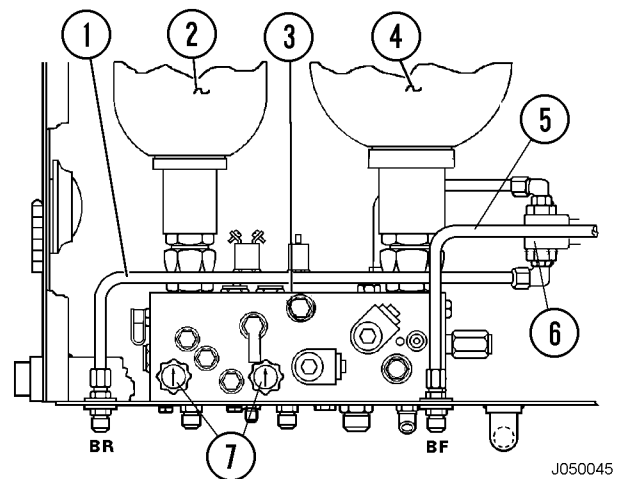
BRAKE MANIFOLD AND COMPONENTS
